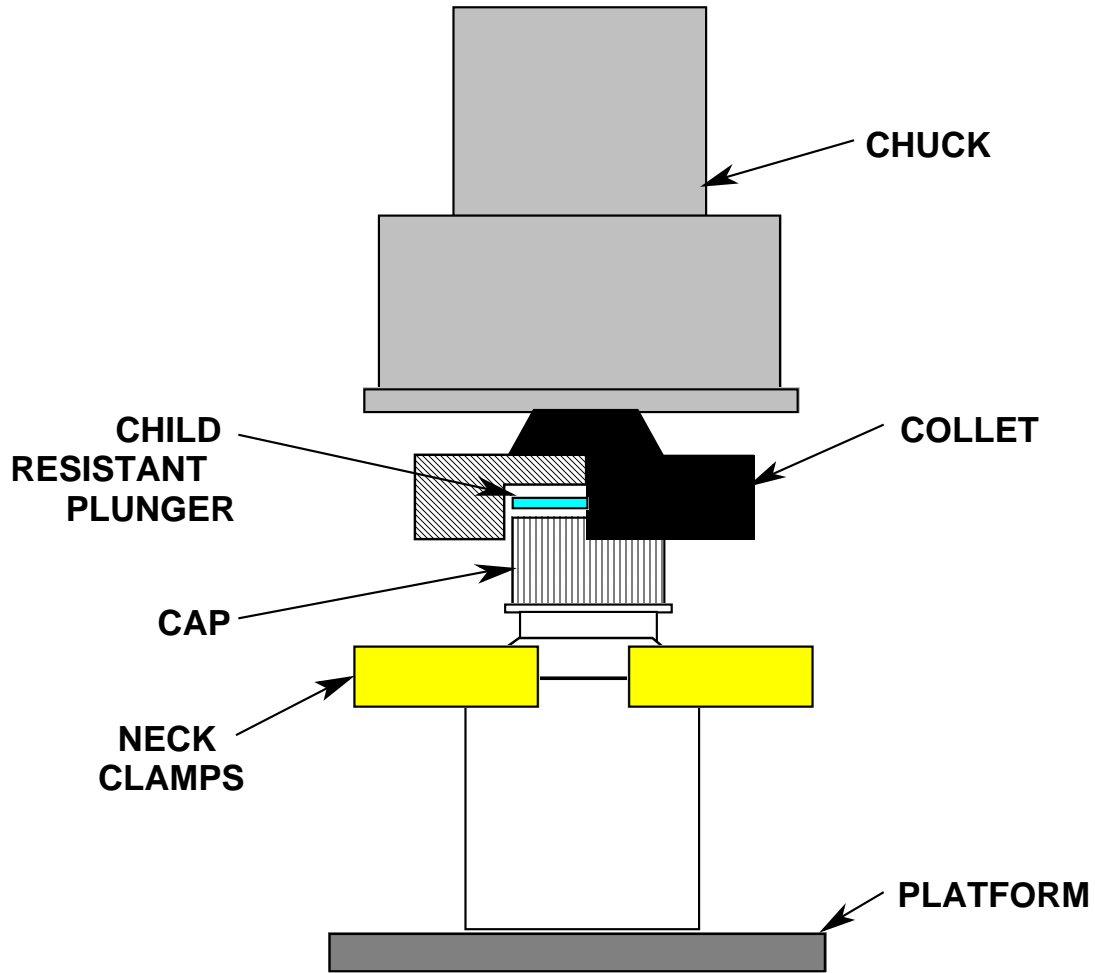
, BT-94 Bench top Capper Mechanical Components (Chuck Assembly).
